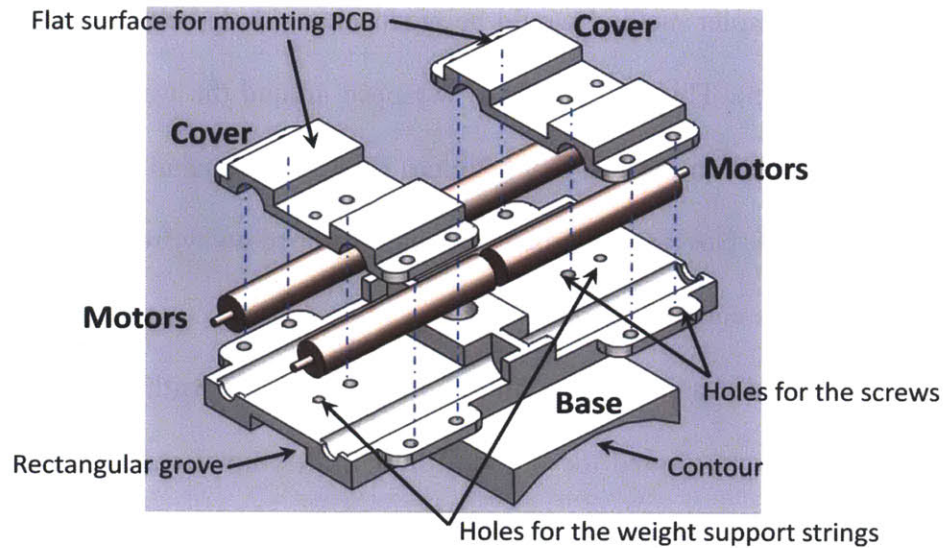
Exploded view of the base, two covers and the four motor assembly.
